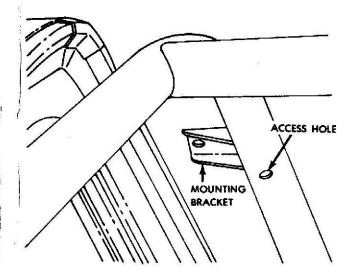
Roll Bar Access Hole (L. H. Shown)
